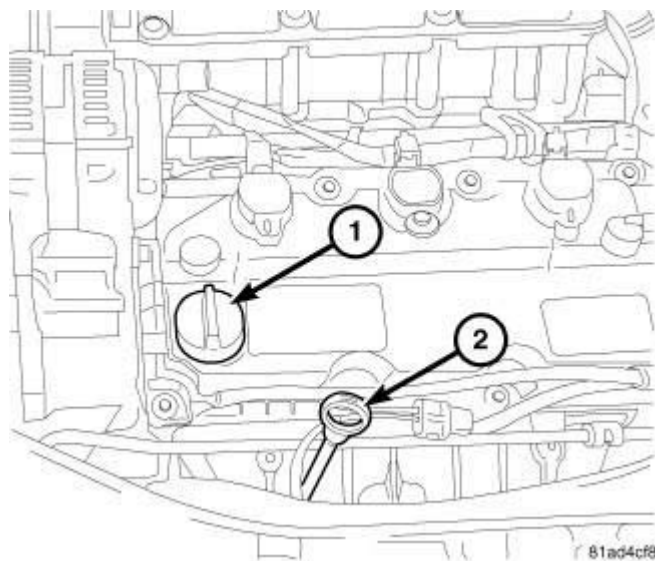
ENGINE OIL FILLER CAP & DIPSTICK
